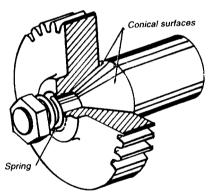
A cone clutch is formed by mating a taper on the shaft to a beveled central hole in the gear. Increasing compression on the spring by tightening the nut increases the drive's torque capacity.
